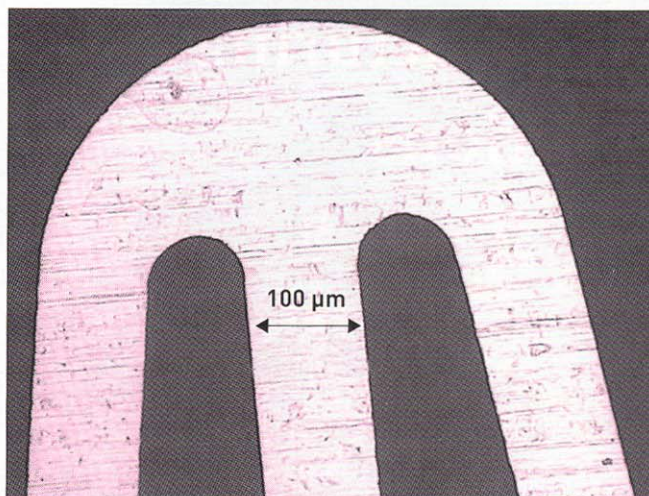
A water-jet-guided laser cuts stainless-steel edges cleanly.
